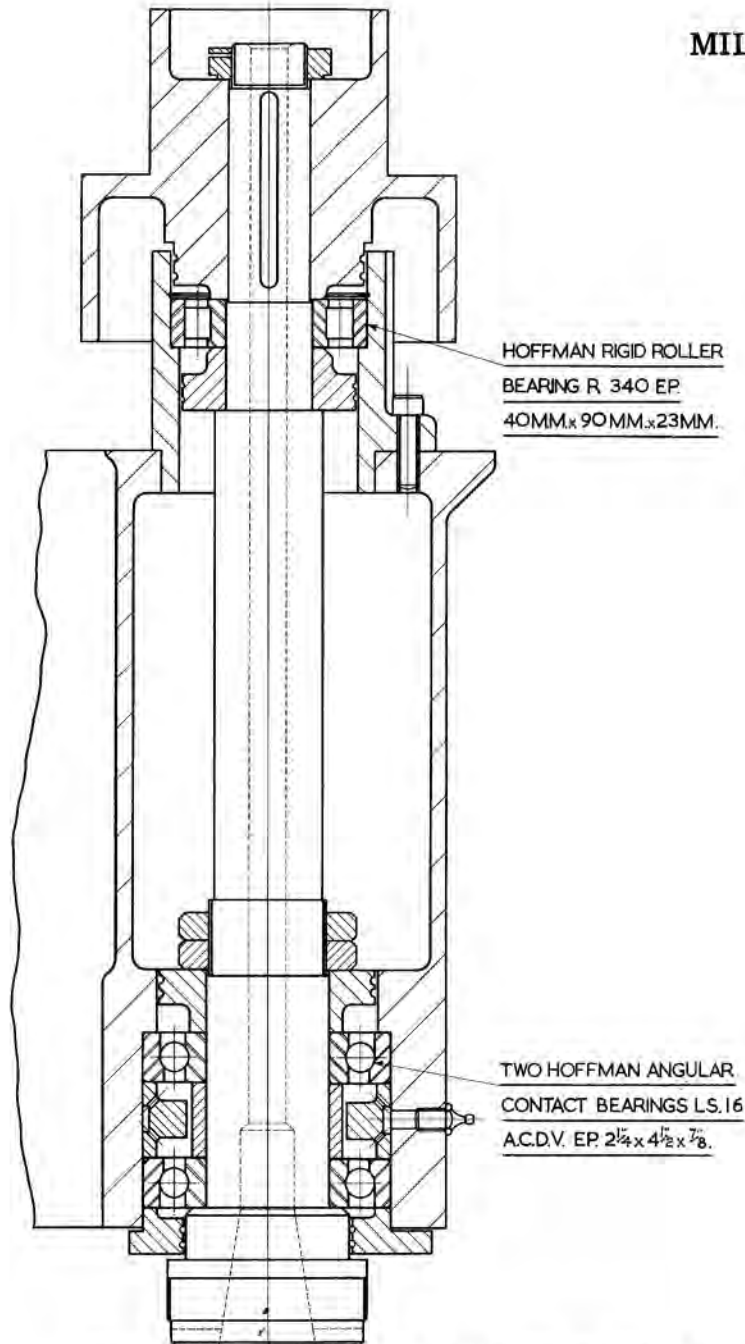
SECTION THROUGH CUTTER SPINDLE FOR L.H. 2. MACHINE.
